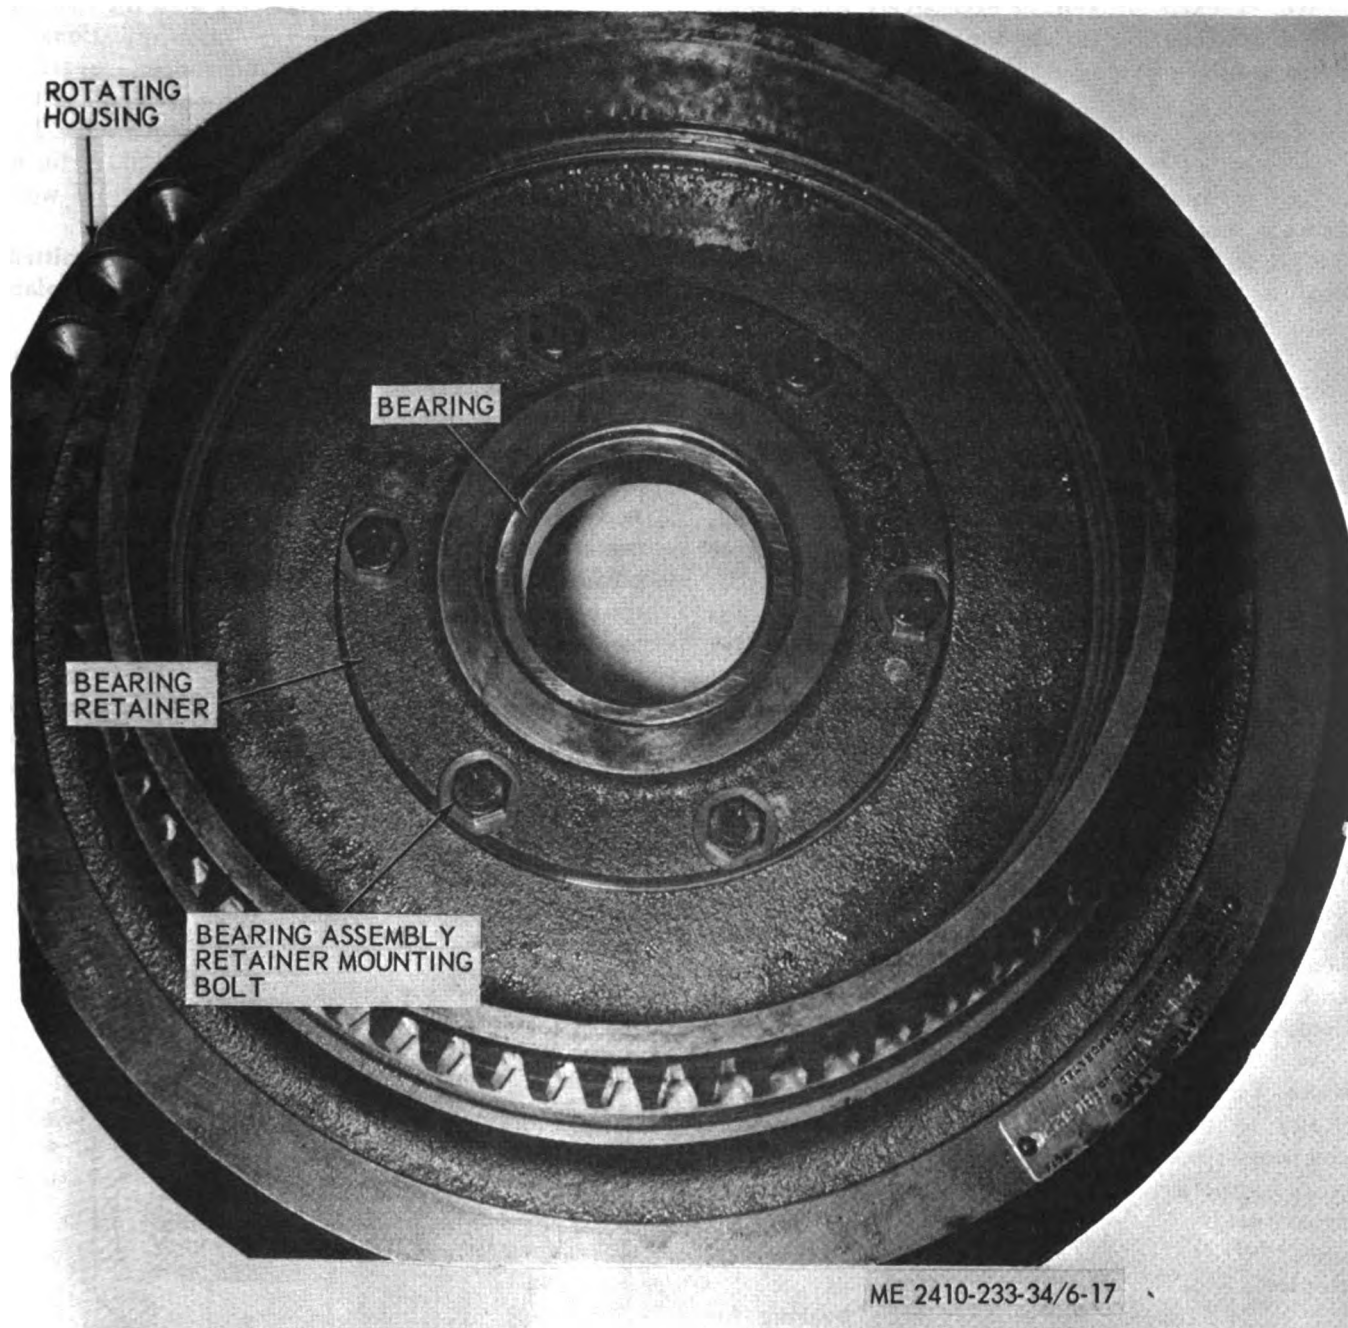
Rotating housing bearing and bearing retainer removal.
